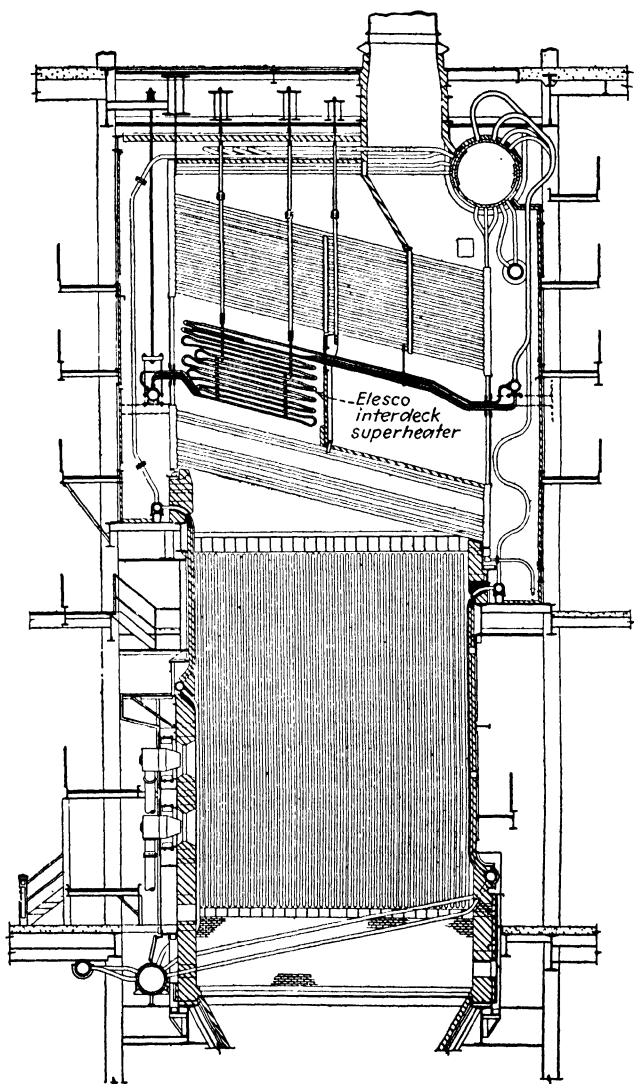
Multi-loop inter-deck superheater with headers outside of boiler casing. (*Superheater Company.*)
